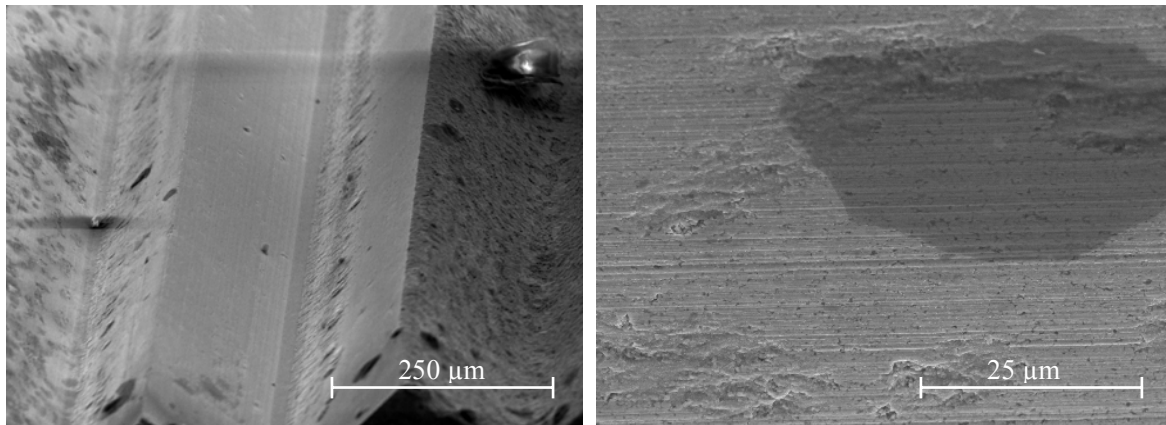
a) Vee-groove machined in Tungsten Carbide and zoomed view of the surface b) zoomed image of the surface
